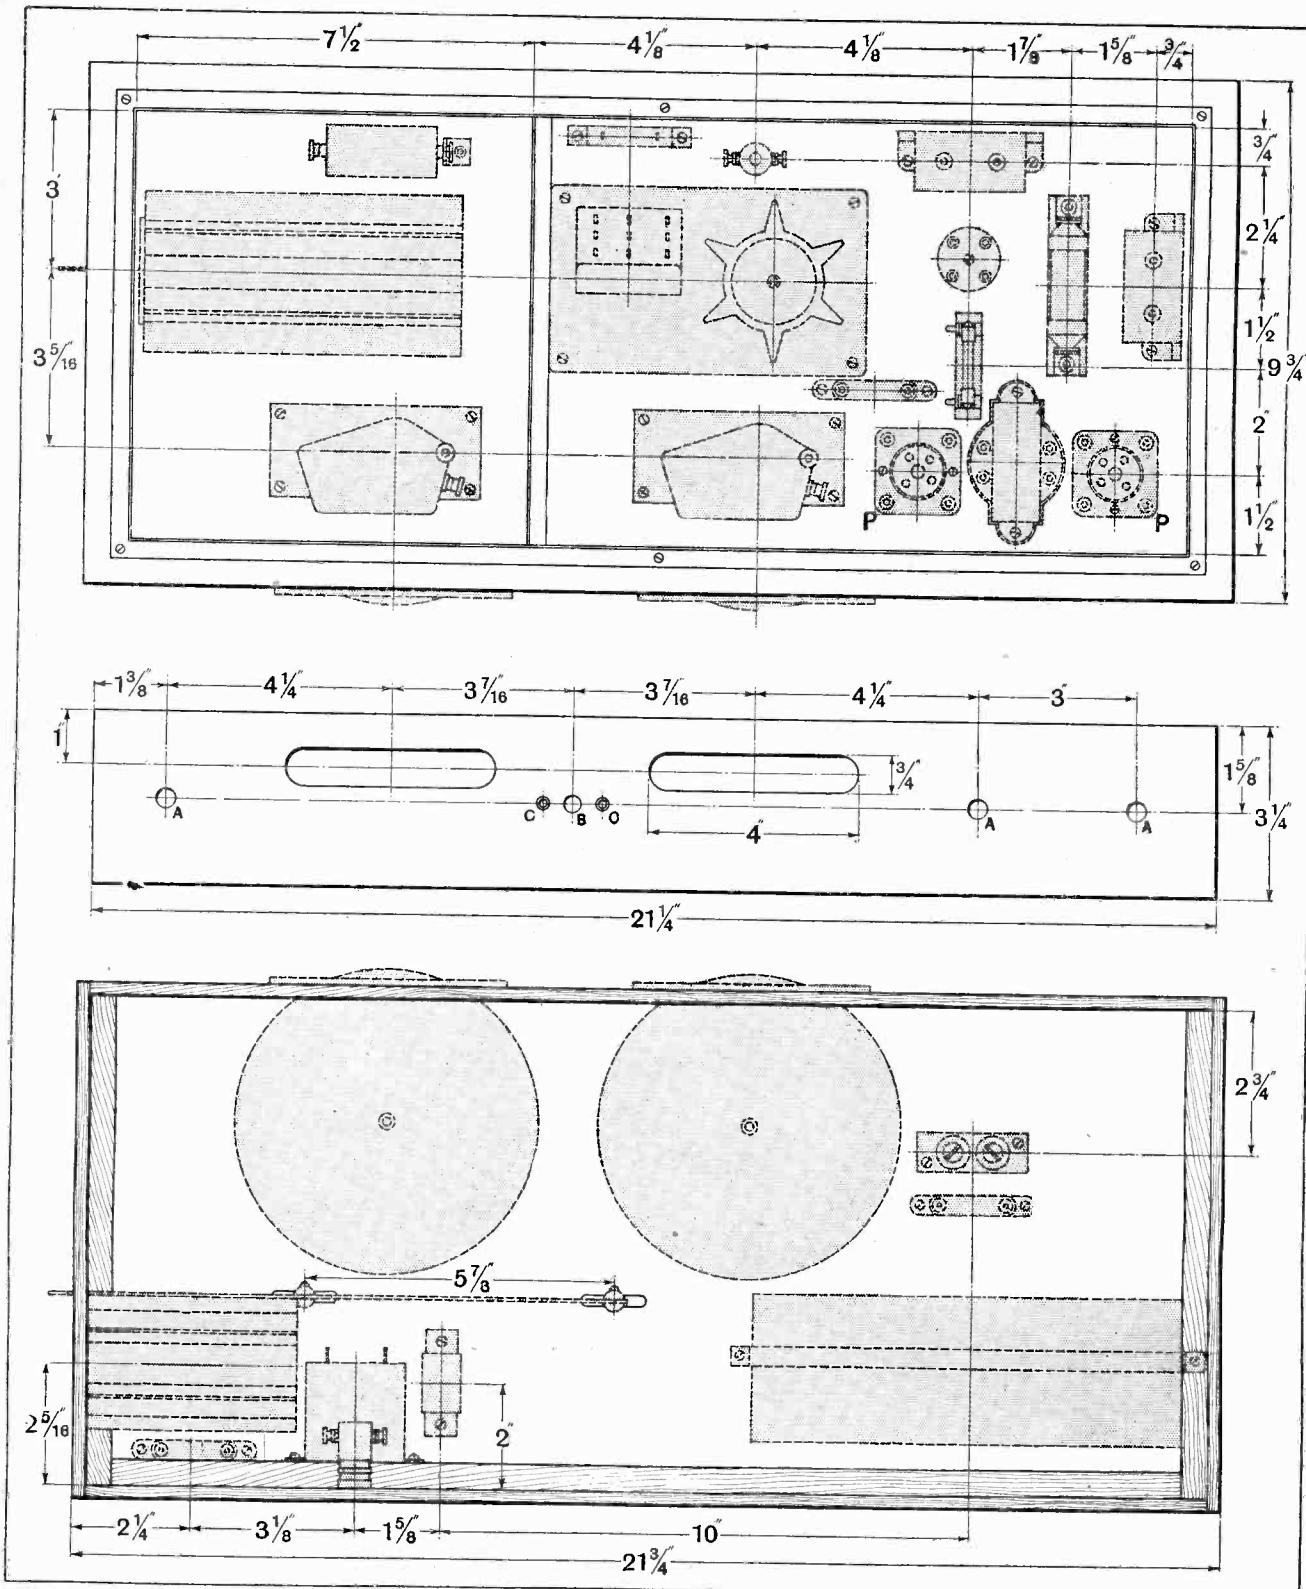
Layout of components and drilling details of front panel of base. A, 3 8in. dia.; B, 5/16in. dia.; C, 1/8in. dia., countersunk for No. 4 B.A. screws.
